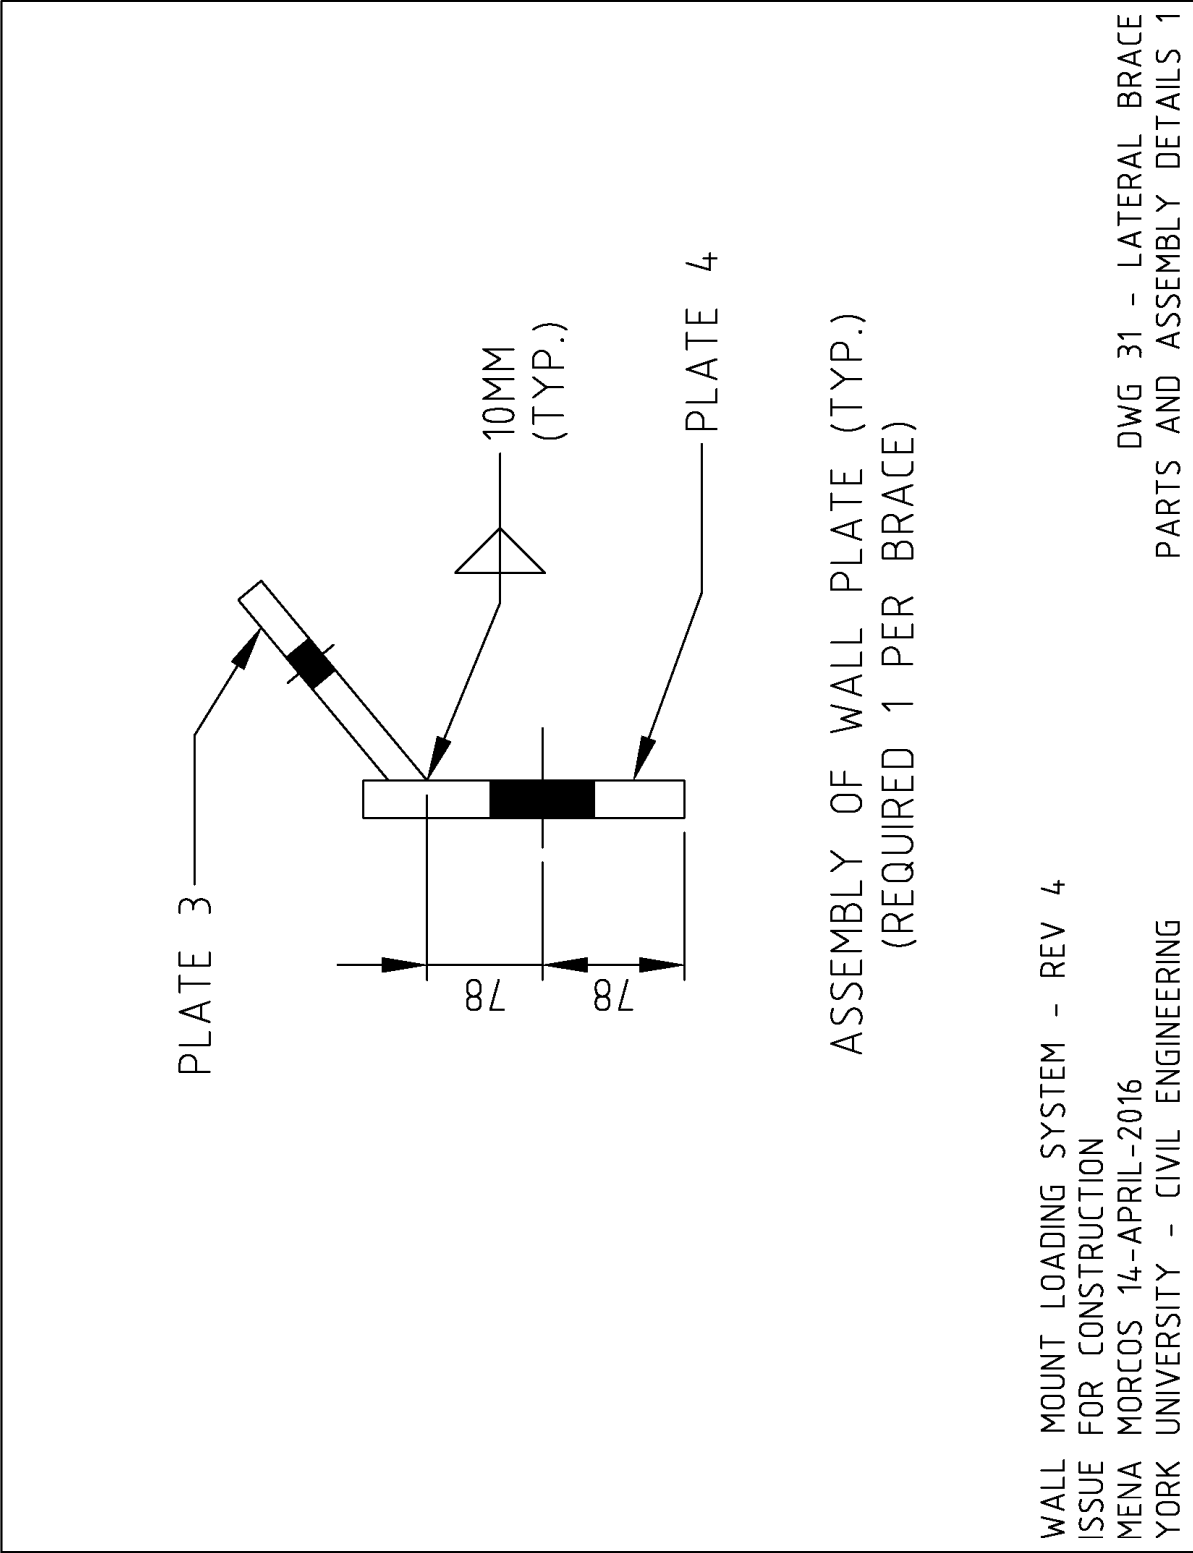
Wall mount loading system design and fabrication drawing – Drawing 31.
